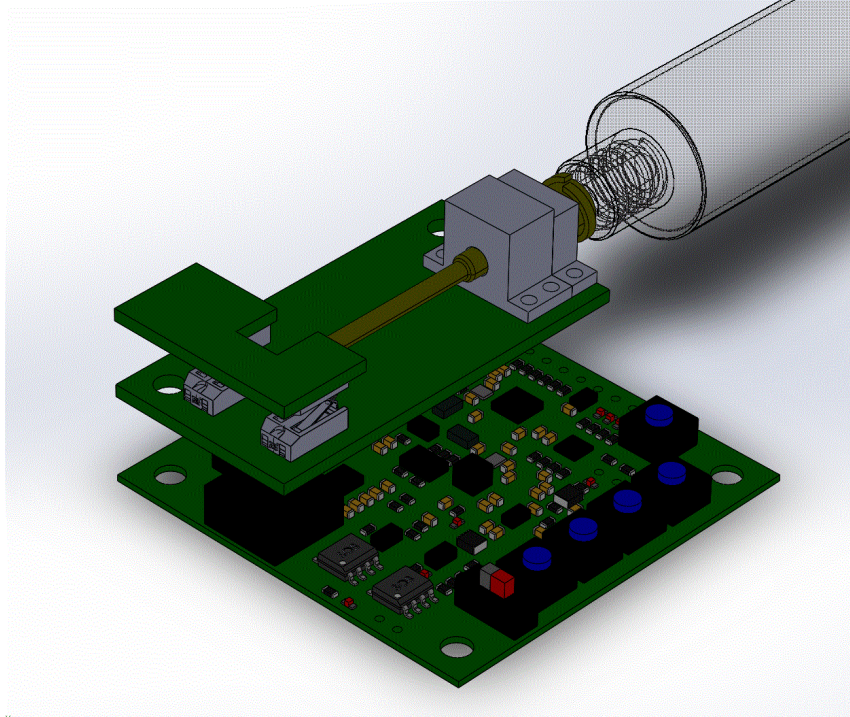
The full nebulizer assembly mocked together in computer-aided drafting to confirm the assembly will work with sufficient part clearances and alignment. With careful inspection, this can help prevent tedious iteration and revision of fabricated parts to remedy otherwise easily overlooked dimensional and compatibility mistakes.
